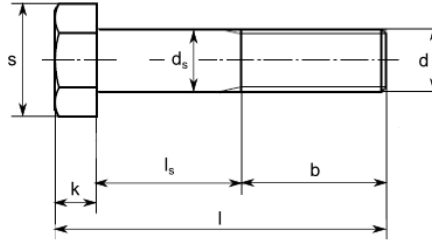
Nominal Geometry of the DIN 601 M10 bolt
